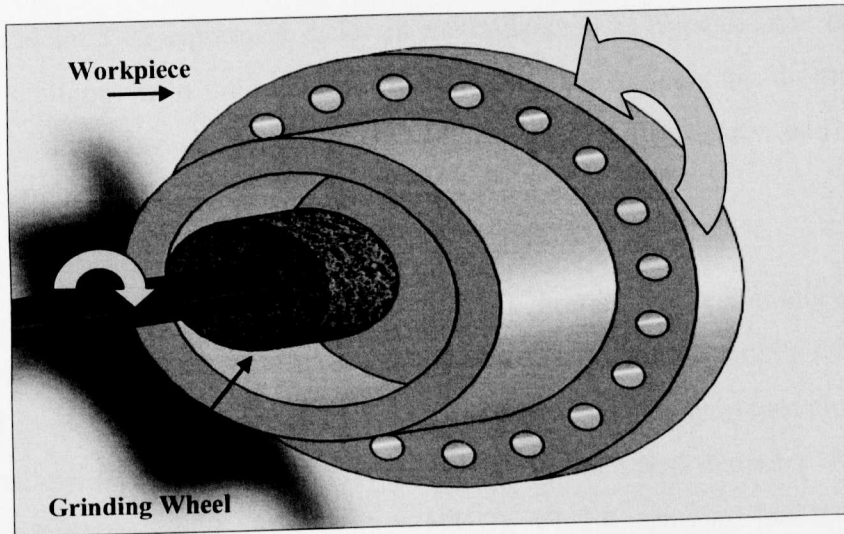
3: Internal Diameter Cylindrical Grinding.
